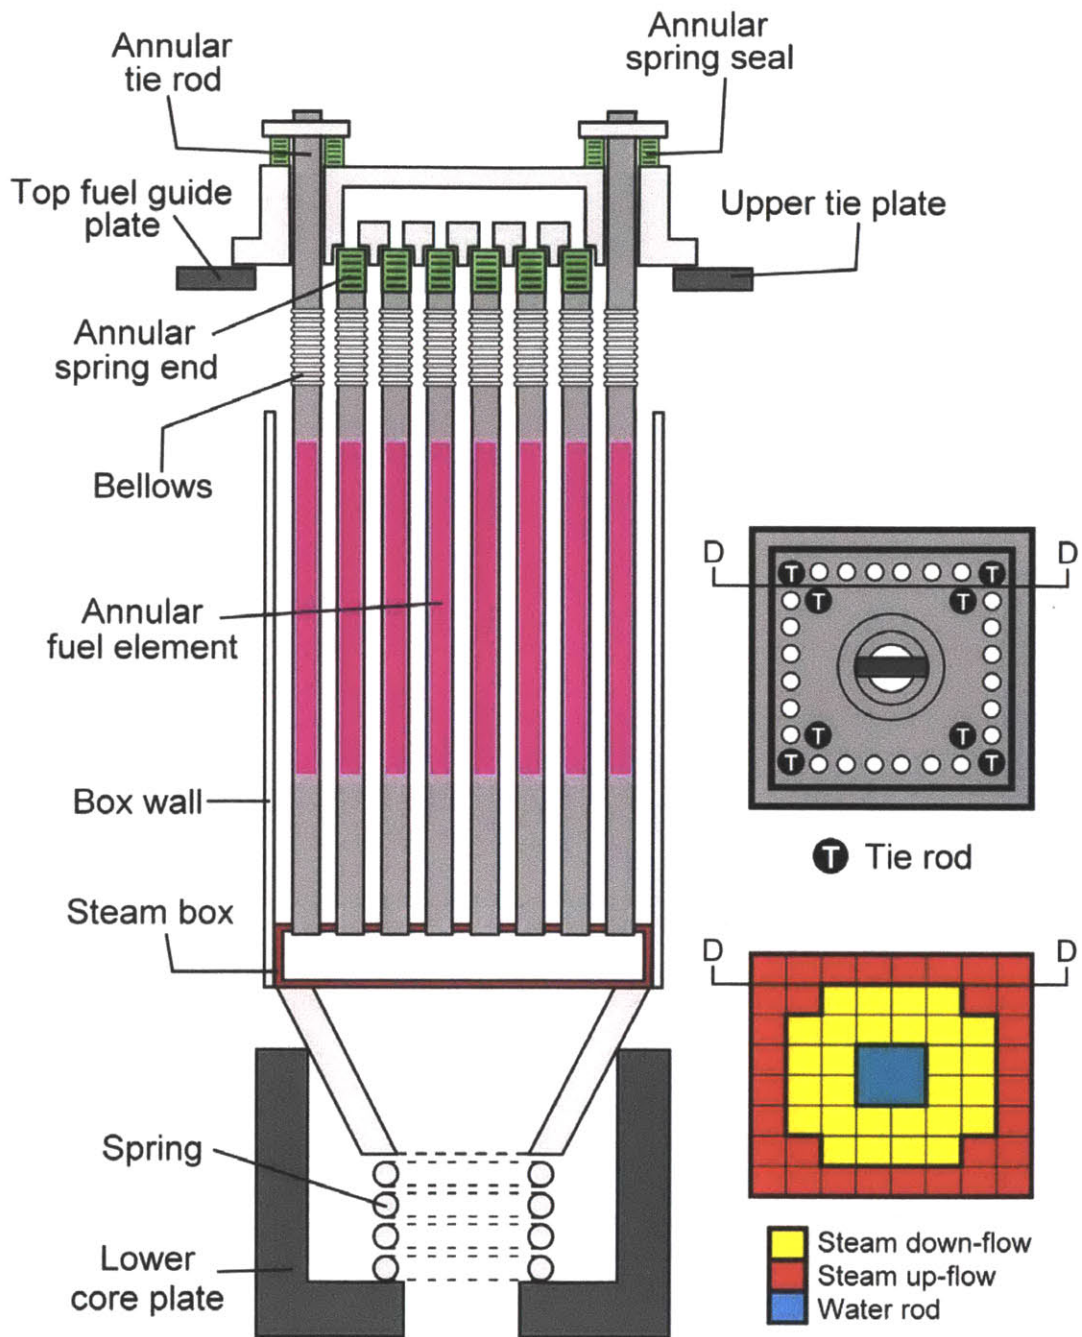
Cross-sectional view of the ASBWR fuel assembly (D-D)
